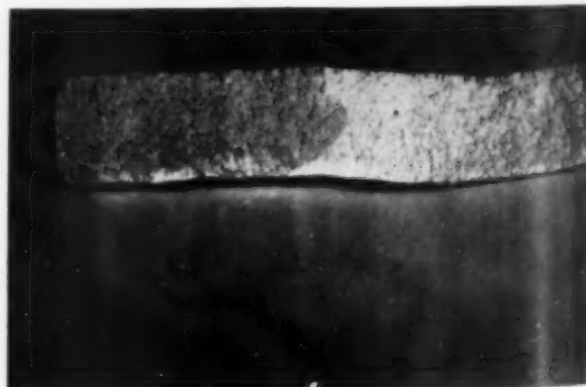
Hot-Short Crack Shown by the Darker Surface (Brownish-Yellow) in the Lighter Surface of a Magnesium Alloy Casting That Has Been Broken Cold for Inspection
